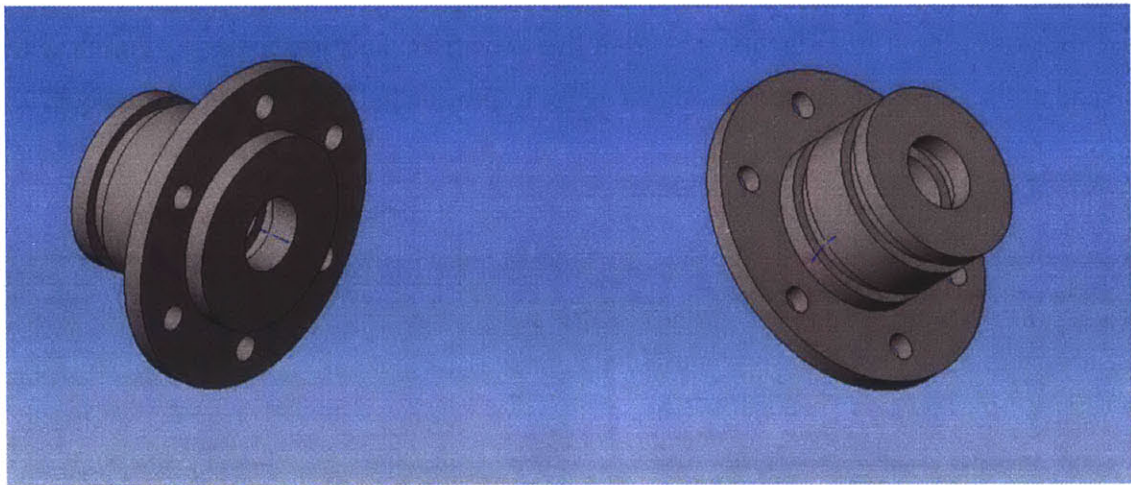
Solidworks drawing of a single-piece construction Lexan shaft seal boot.
